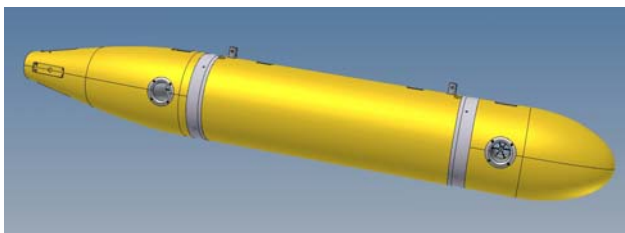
CAD drawing of the Autosub model showing forward and aft thruster tunnels (control surfaces and stern propulsor not shown)
